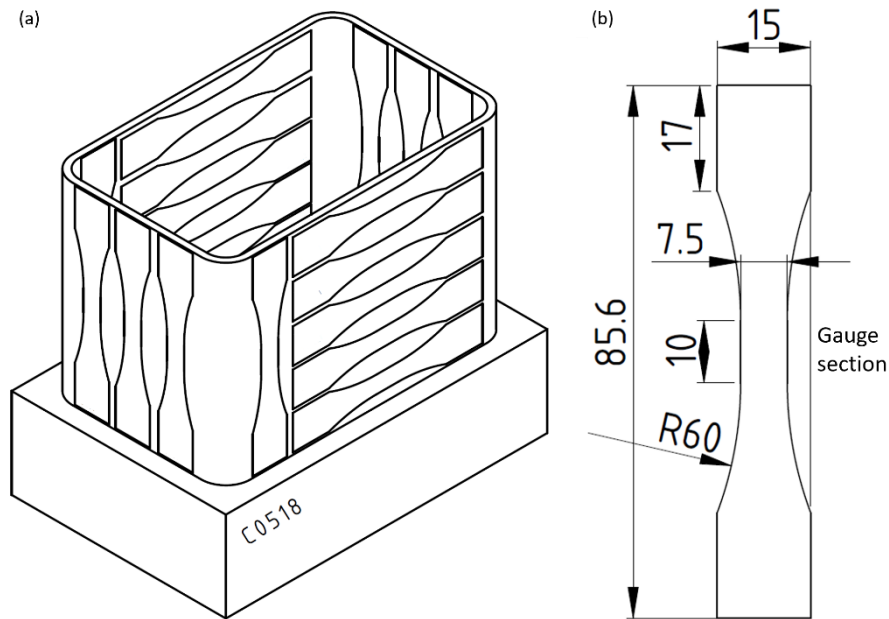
(a) Cutting plan for extraction of the fatigue specimens and (b) dimensions of the fatigue specimens (The final thickness was obtained by grinding the surfaces until the AM surface was fully removed).
